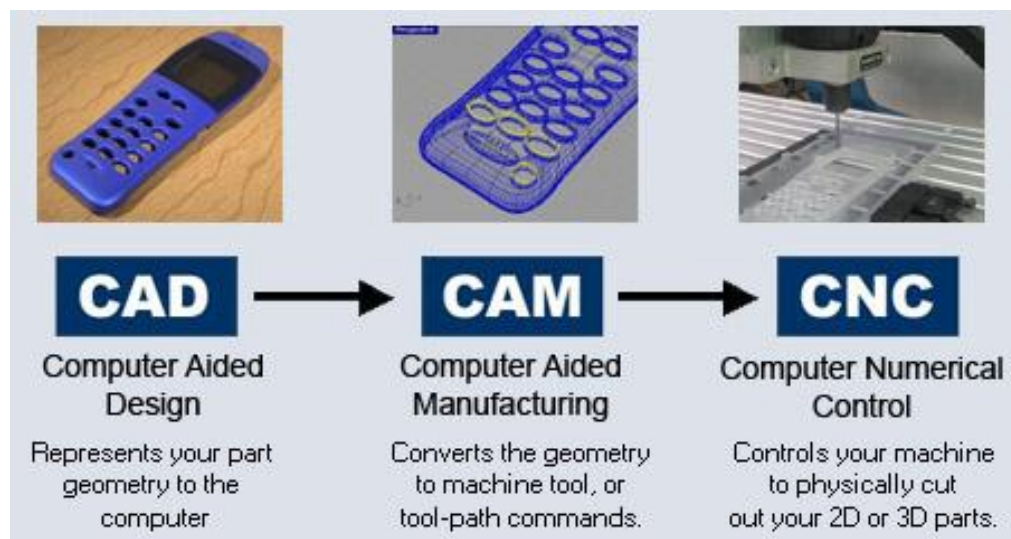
CAD, CAM, and CNC for a remote control. Image from woodworking machines maintenance center.⁽⁸¹⁾
